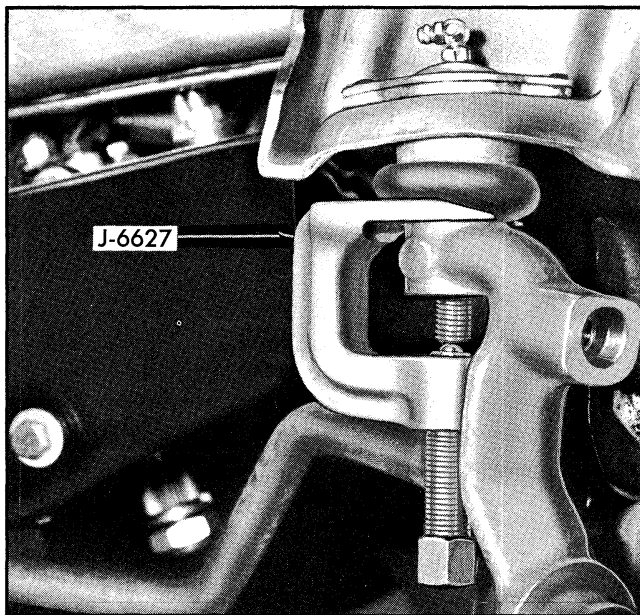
Pressing Ball Stud from Steering Knuckle
